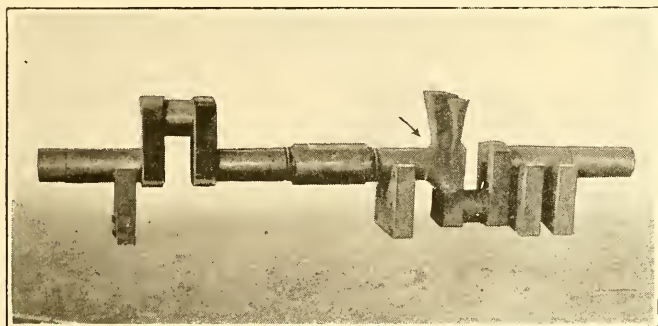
Two-Throw Crankshaft Welded—Repair Made in 72 Hours.
